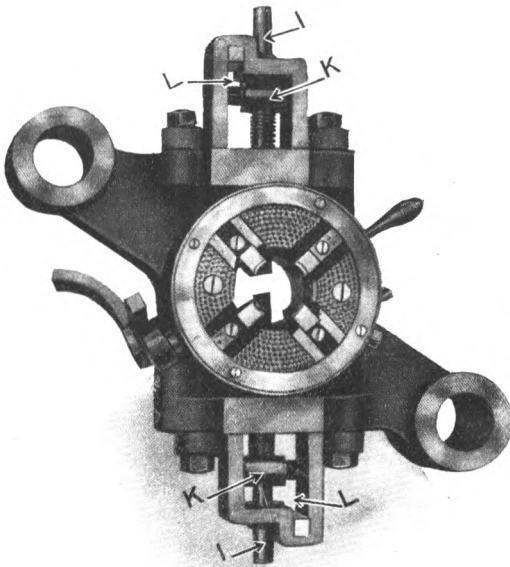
DIE HEAD FOR THREADING STAYBOLTS
